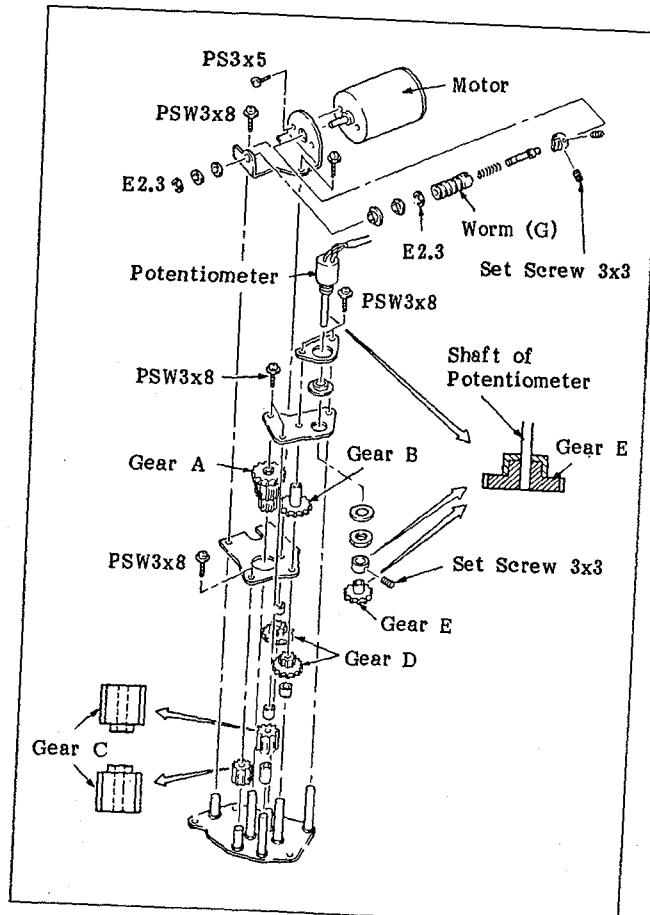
Replacing the Components of the Gear Box Assembly
